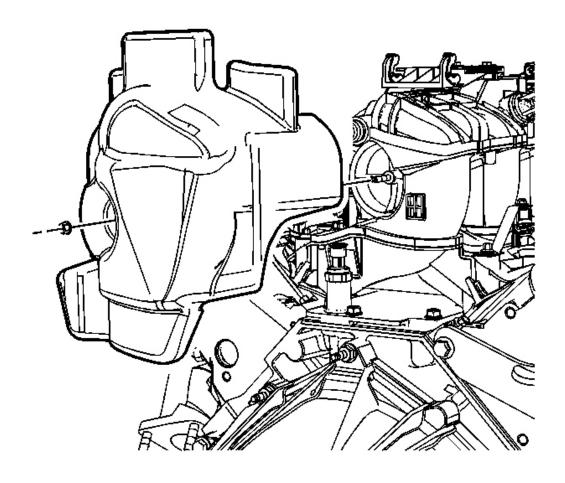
Upper Intake Manifold Cover Nut Courtesy of GENERAL MOTORS CORP.
